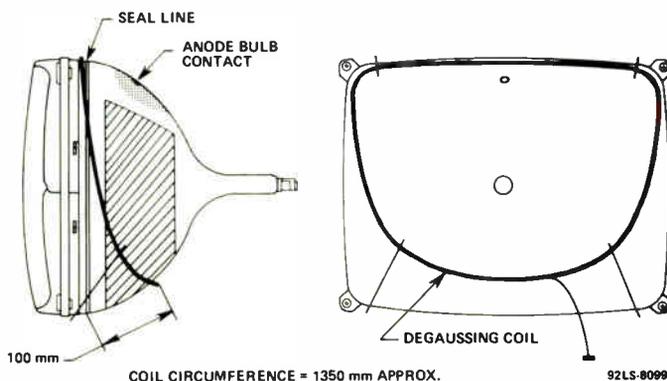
Relative Placement of Typical Tilted "Z" Degaussing Coil
